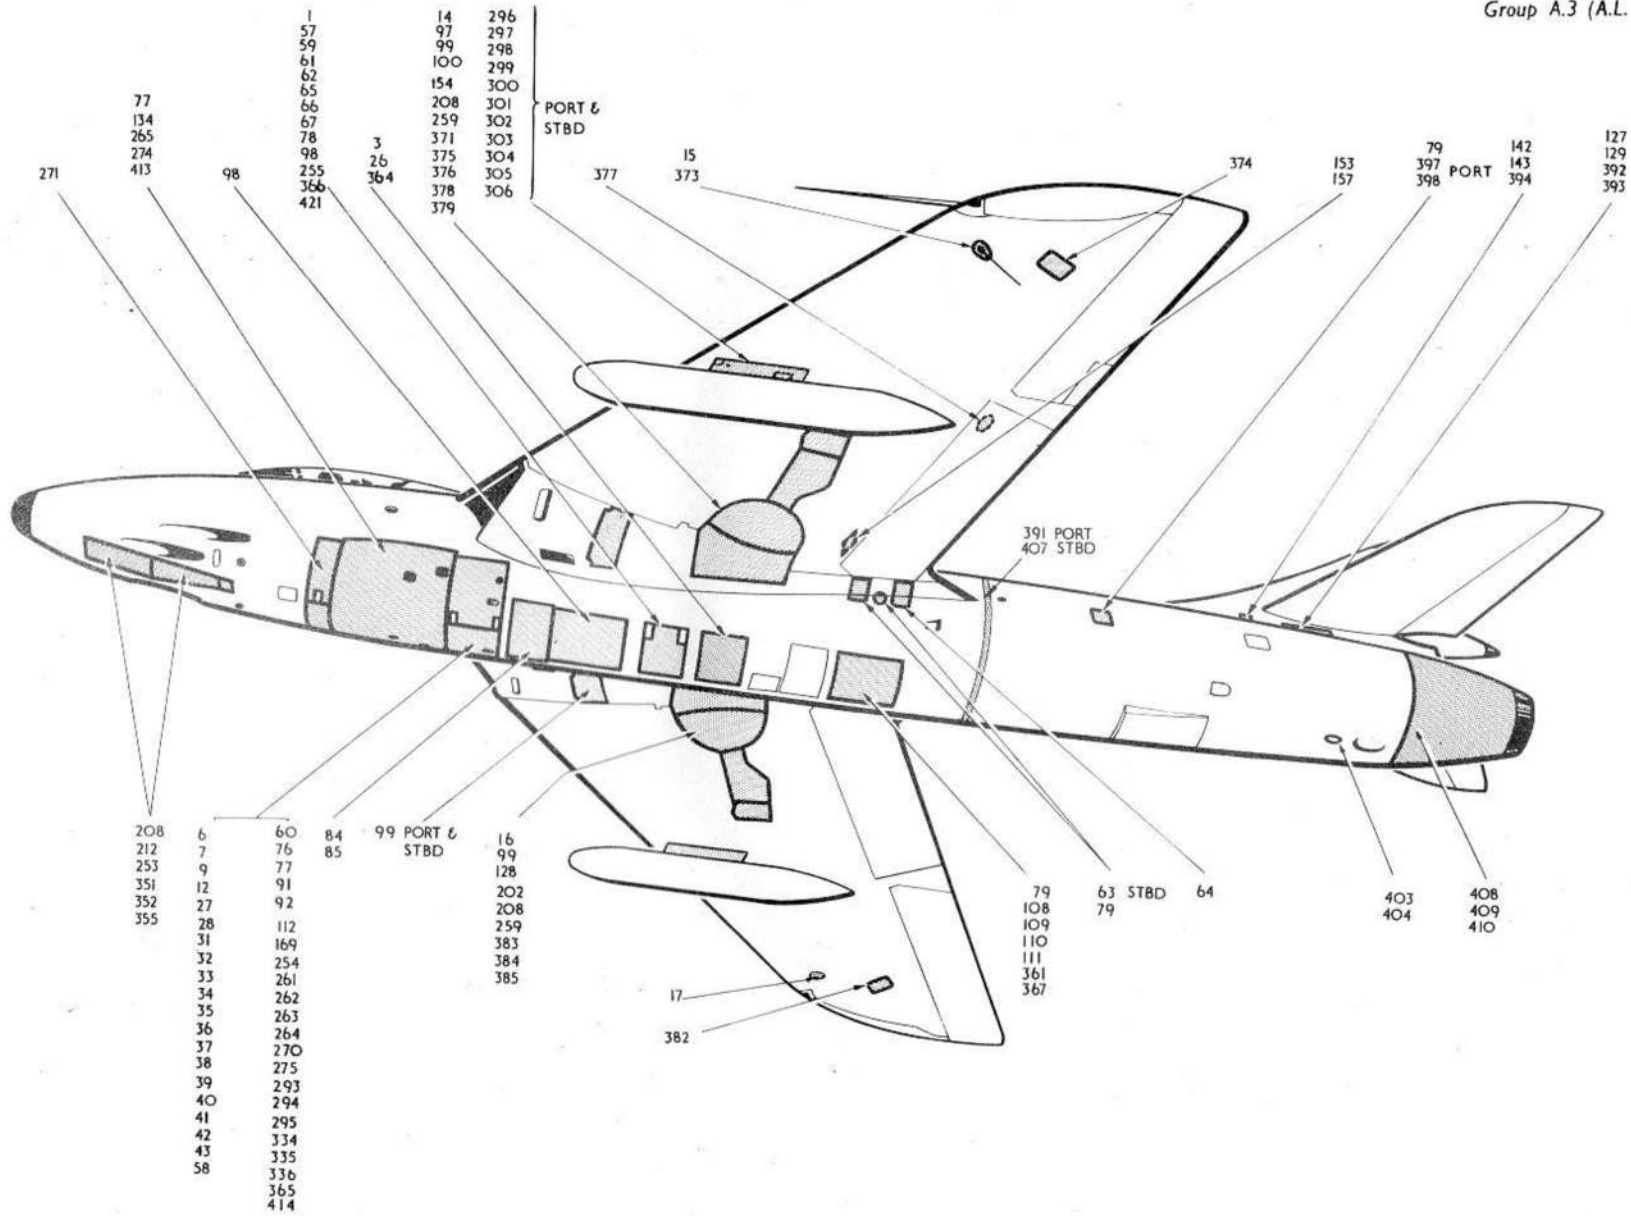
ACCESS PANELS. (BOTTOM SURFACES)
